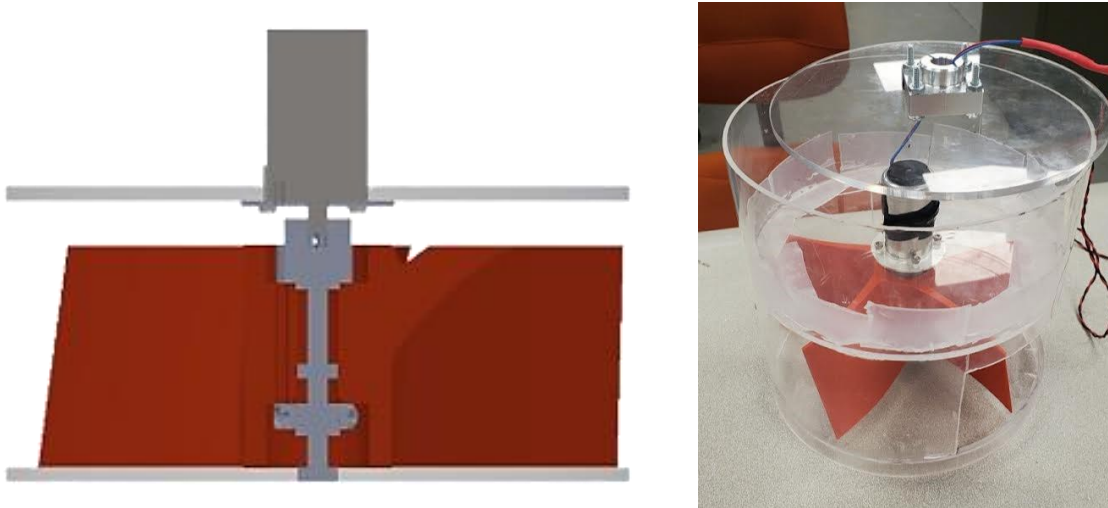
CAD model of assembly (left) and turbine assembly in progress (right).
